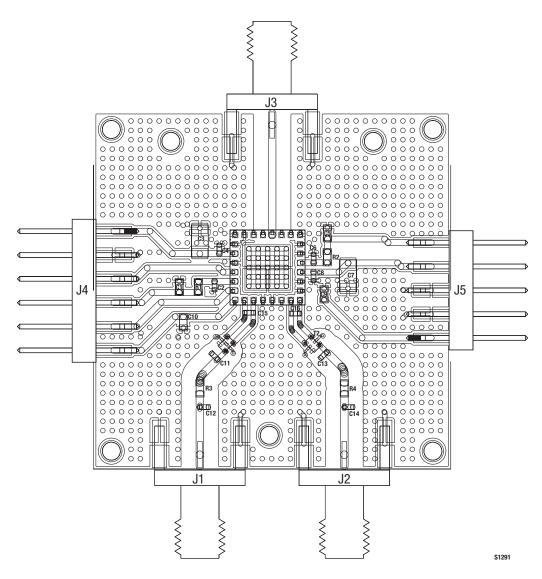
SKY65337-11 Evaluation Board Assembly Drawing
